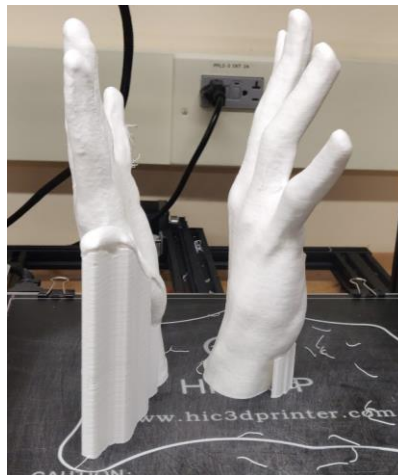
Completed three-dimensional printed hand before cleaning on the Creality CR-10 three-dimensional printer (image provided by the Earl E. Bakken Medical Devices Center at the University of Minnesota).
